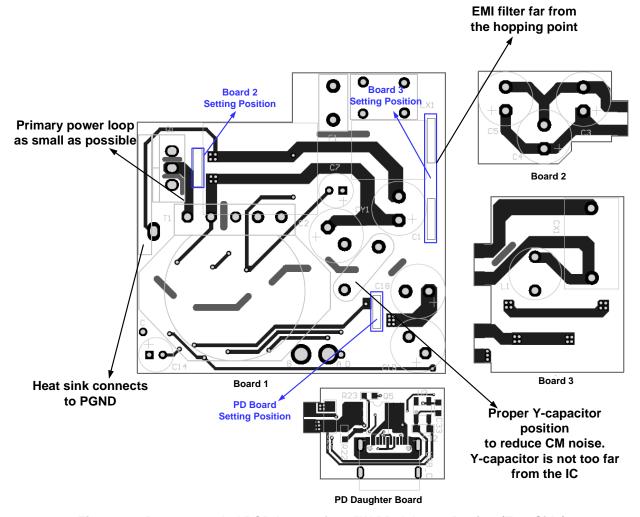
Recommended PCB Layout for 65W PD Adapter Design (Top-Side)
